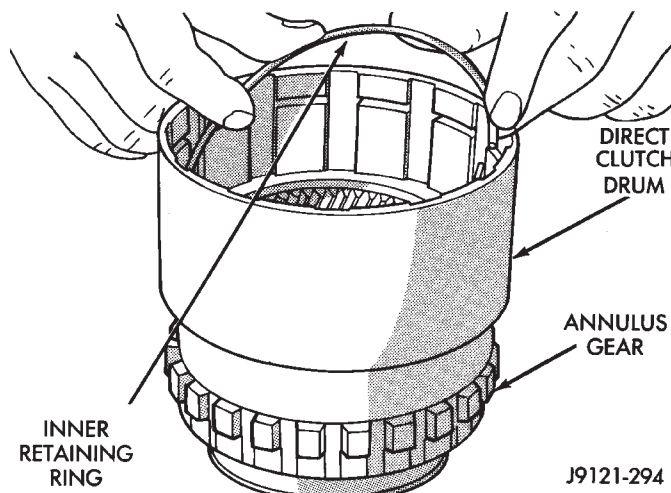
Installing Clutch Drum Inner Retaining Ring
